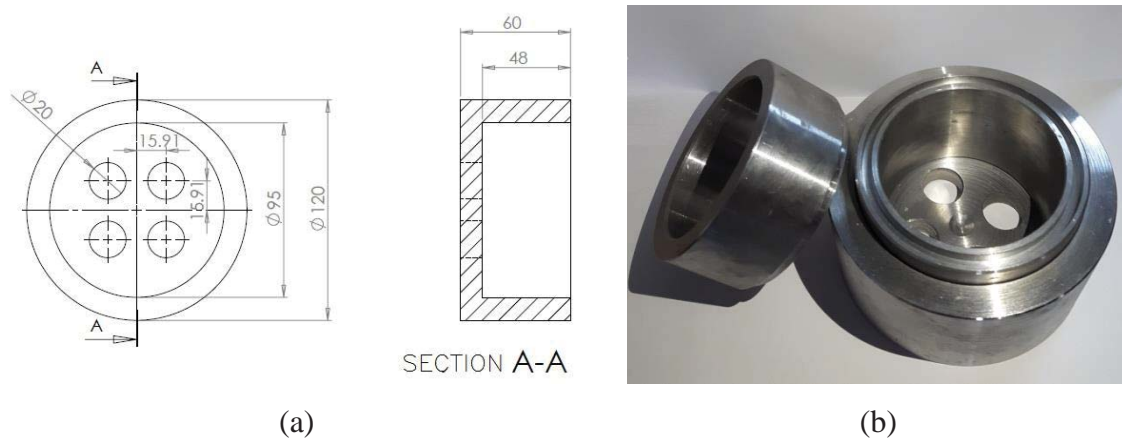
(a) Technical drawing and (b) the final view of pattern.
